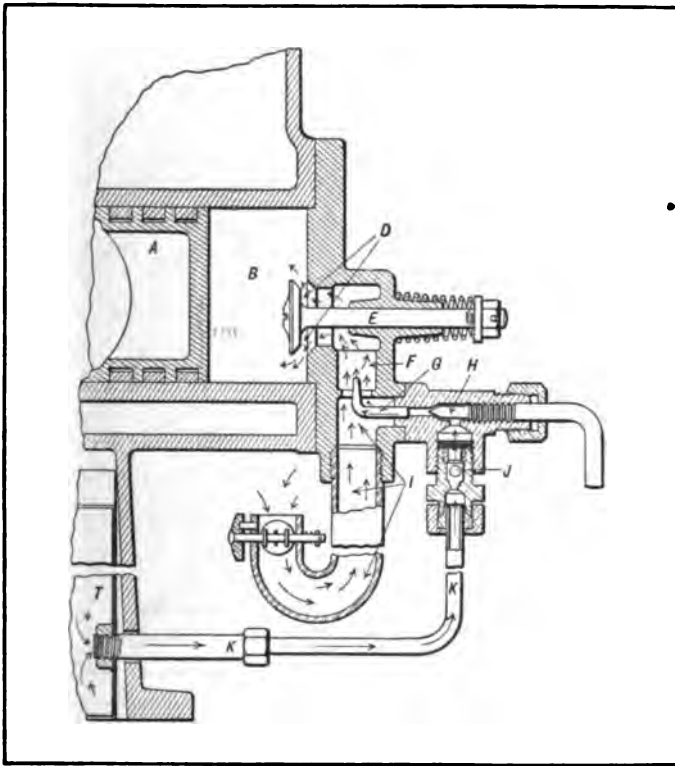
Sectional view explaining action of Gray fuel vaporizer.
